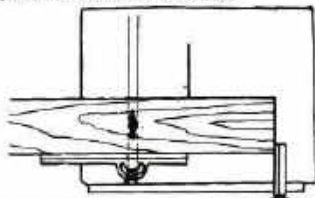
SQUARING BOARDS WITH THE CUT-OFF GUIDE
